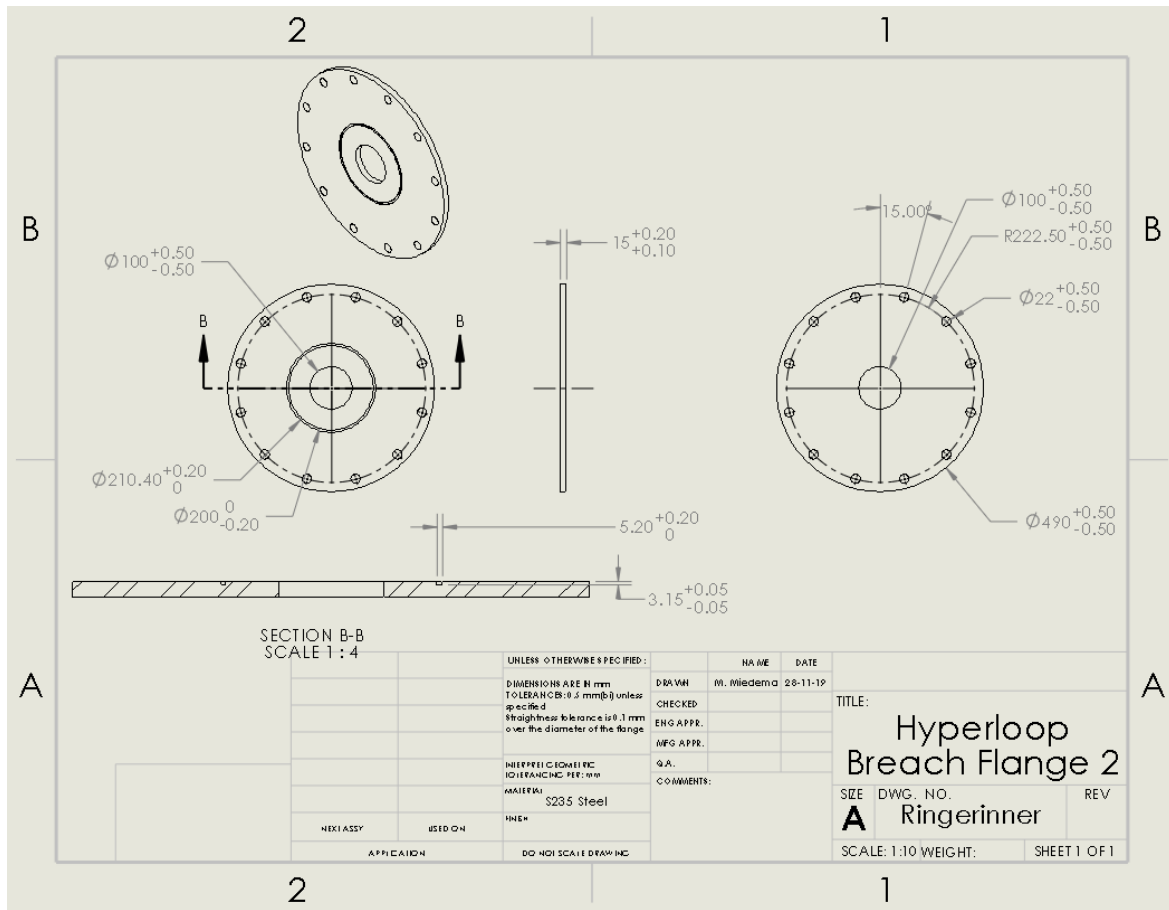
Detailed drawing of the inner connection ring used in Hyperloop Breach testing
